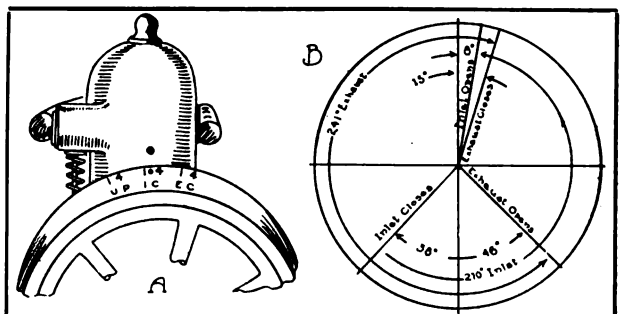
Illustrating Utilization of Flywheel Marks and Timing Diagram for Resetting the Valves.
